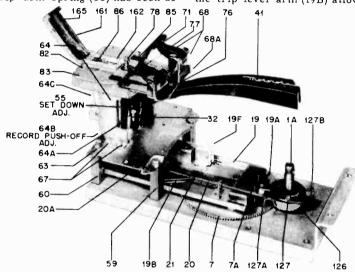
VIEW OF RECORD CHANGER WITH BASE & MOTOR ASSEMBLY REMOVED
